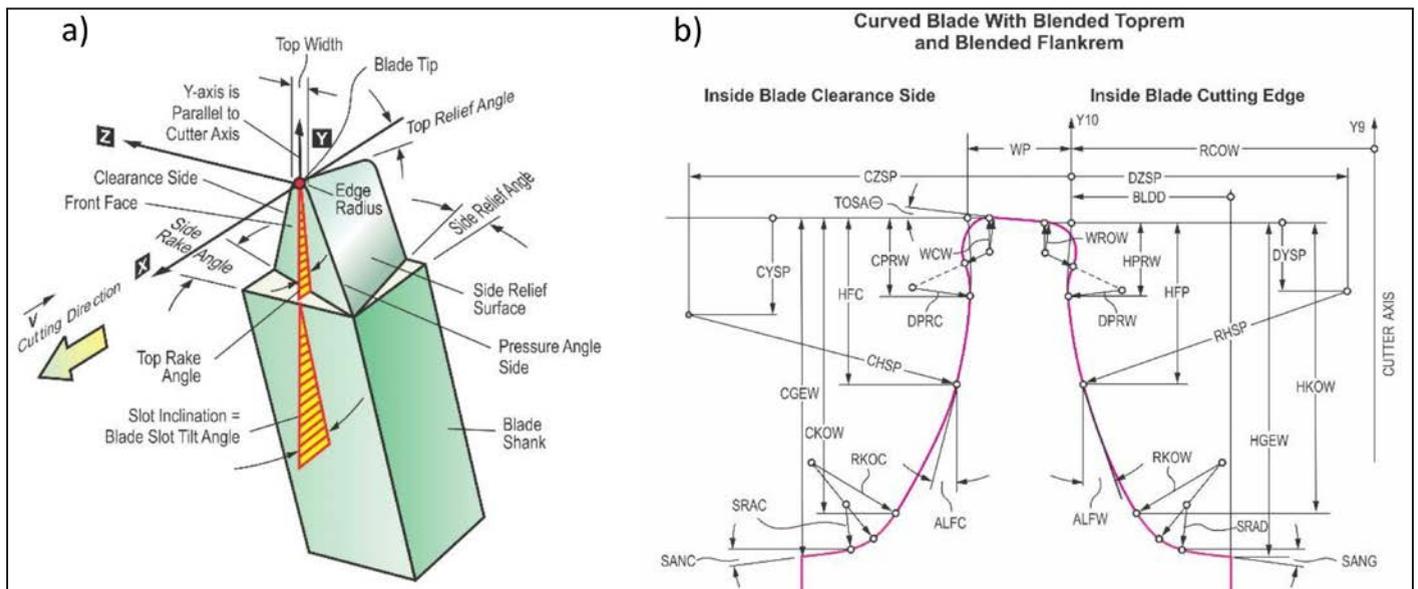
Stick blade geometry (Ref. 3); (a) three-face stick blade, (b) blade geometry definition.
